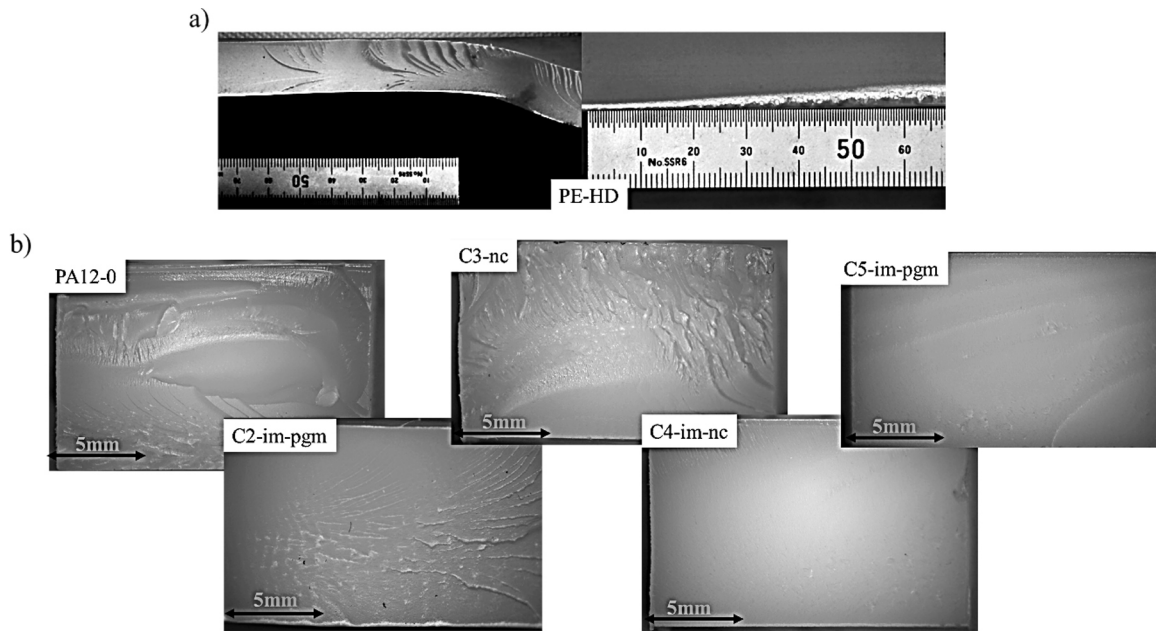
Plane stress deformation zone on inner pipe wall side of an S4 fractured PE-HD pipe surface [20] (a); no distinctive shearing zones on PA12 fracture surface on the inner pipe wall side (b).
